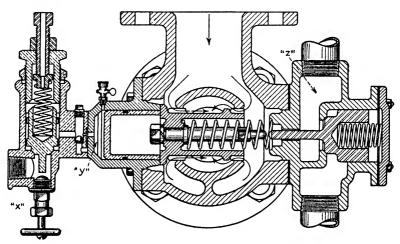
Intake-valve unloader. (Courtesy of Fuller Co.)
